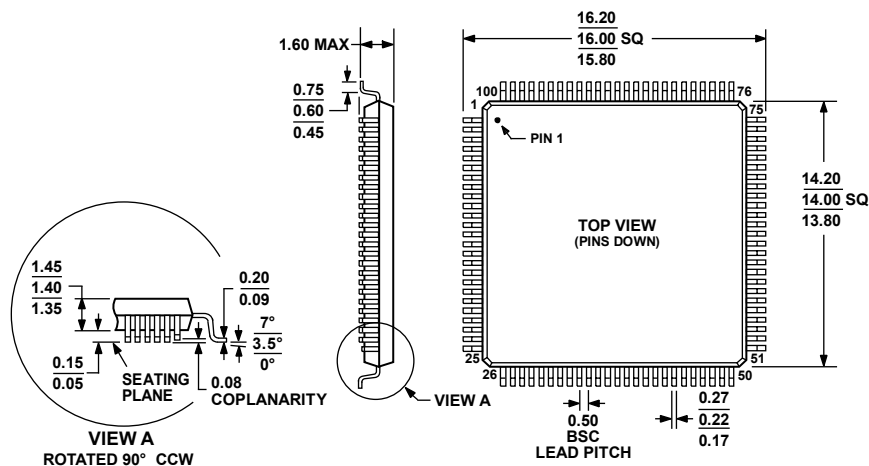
100-Lead Low Profile Quad Flat Package [LQFP]
